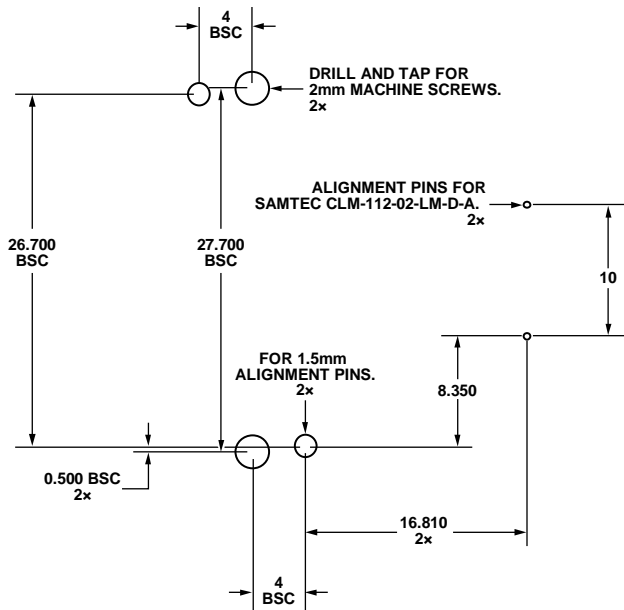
Typical Hole Pattern for the ADIS16365 Attachment
